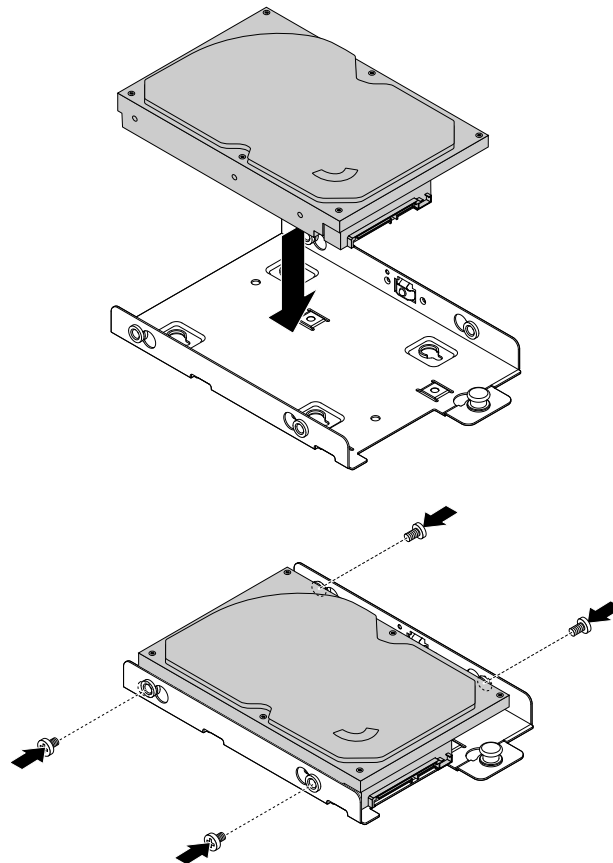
Installing the 3.5-inch hard disk drive to the bracket
